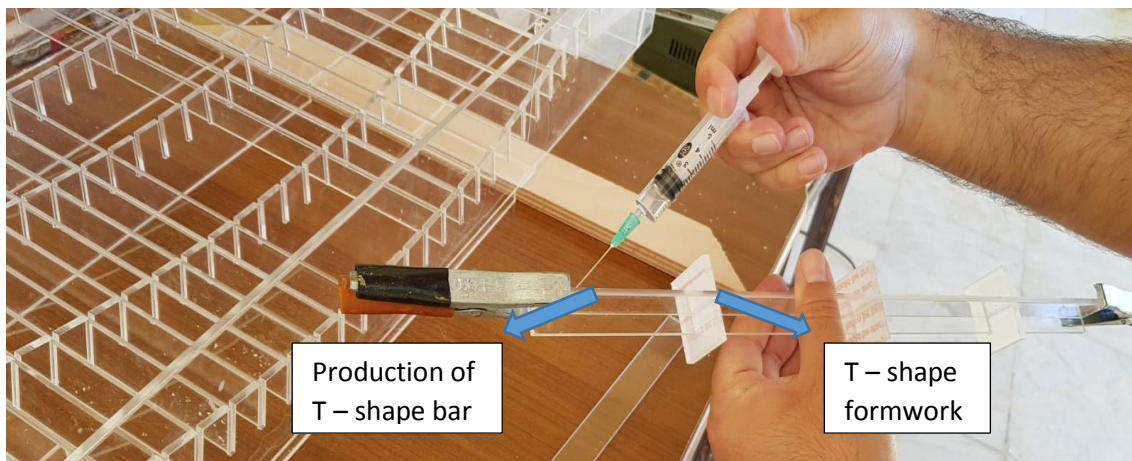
Assembly of a T - shape bar and the T - shape formworks
